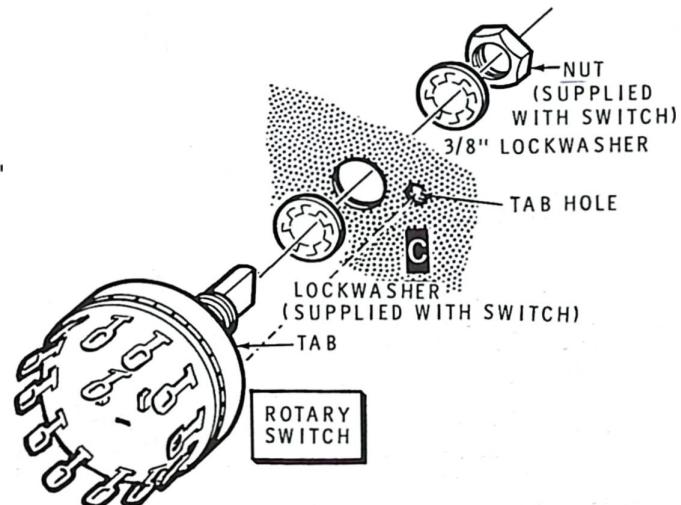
ASUB-PANEL ASSEMBLYSwitch Mounting
